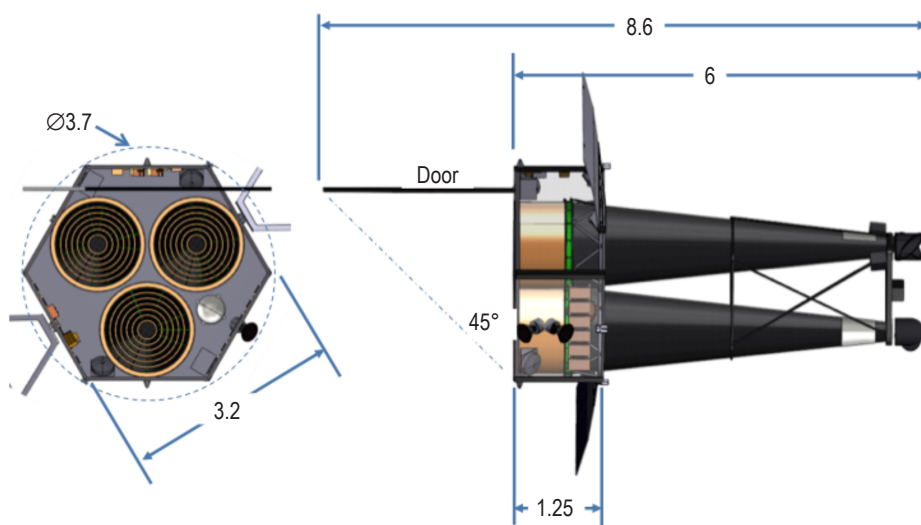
Basic dimensions of the observatory (all dimensions in meters).
